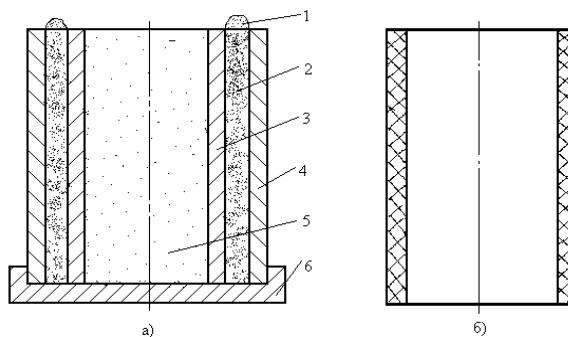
Cylindrical configuration of mold: a) mold assembly; b) filter element; 1) termite; 2) powder batch; 3) internal insert; 4) metal form; 5) filling of internal cavity; 6) bottom
